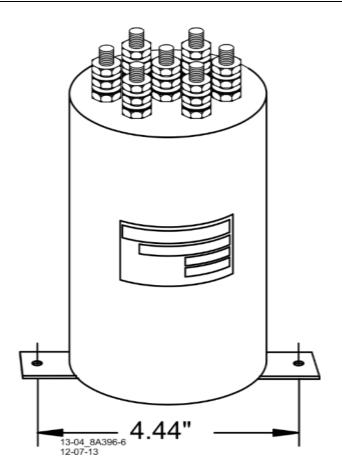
Adjustable Inductor Assembly, 8A398-6
